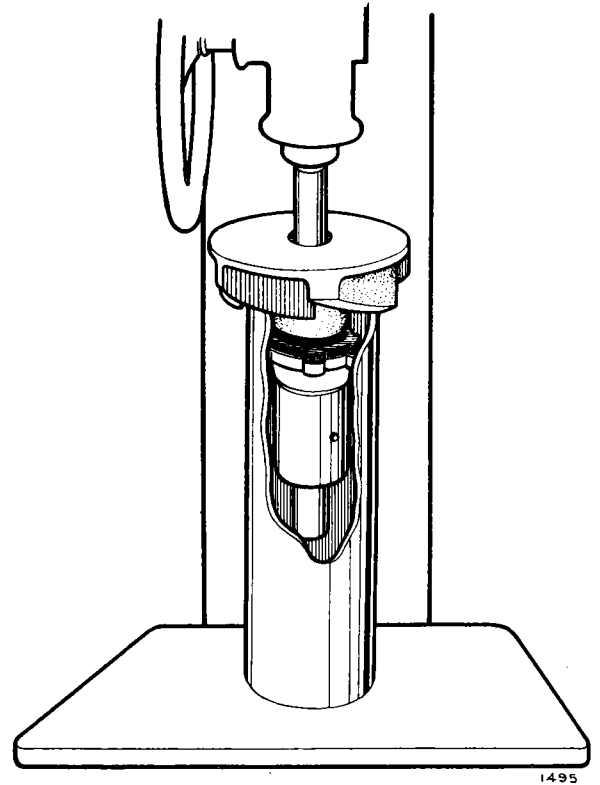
Removing the water pump impeller from the pump spindle
